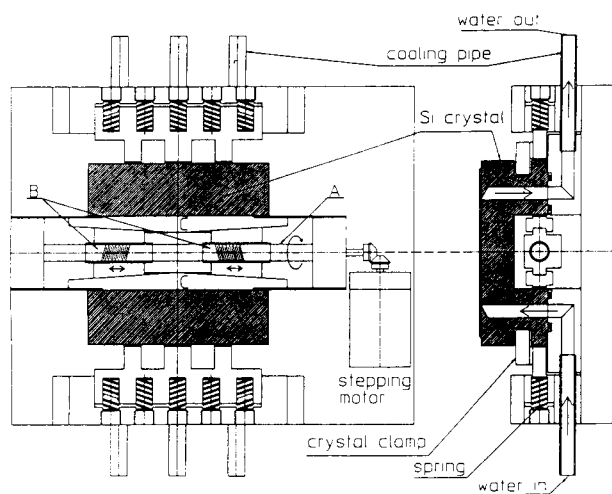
Top view and cross section of the crystal bender with Si crystal. The thin Si wafer is bonded to the grooved Si substrate. Rotation of the center screw A leads the linear movement of the part B relative to the wedge guides C. When both parts B are moved inwards the crystal legs move outwards.
